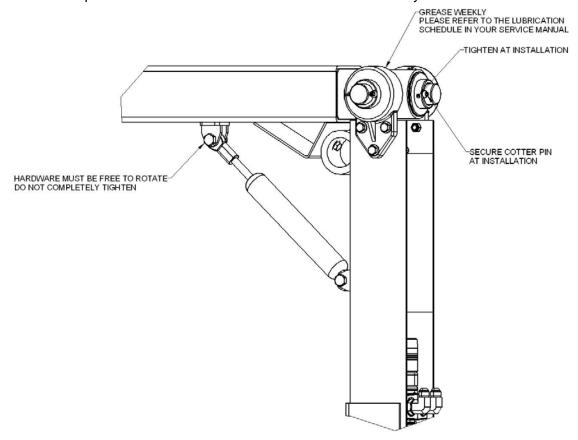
Box and Shaft Assembly Connected to the Arm Weldment
